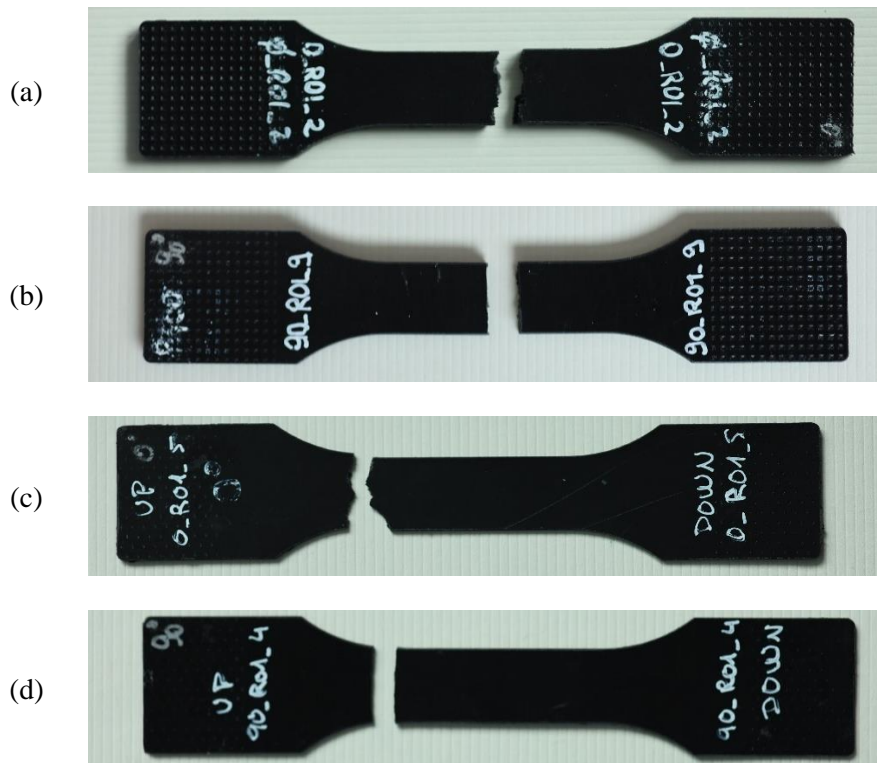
Images of the position and orientation of the fracture surfaces of the a) full 0° b) full 90° c) milled 0° d) milled 90° specimens fatigue tested
